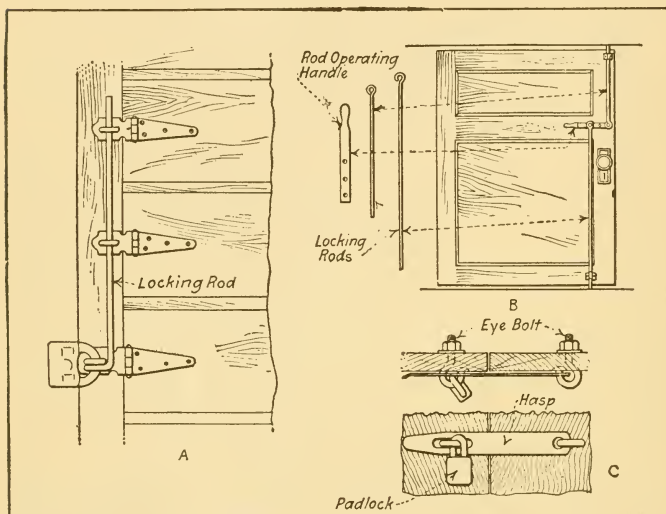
Method of Locking Three Drawers With One Padlock Outlined at A. B—Easily Made Double Bolt for Door. C—Secure Hasp and Padlock Fastenings.
